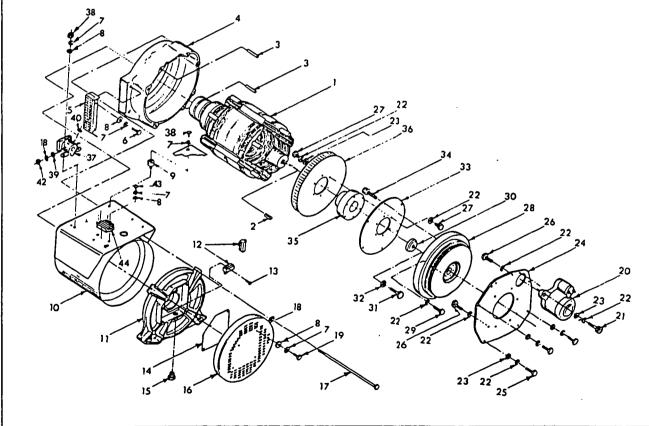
Exploded View of Generator with 10 inch Diameter Stator
